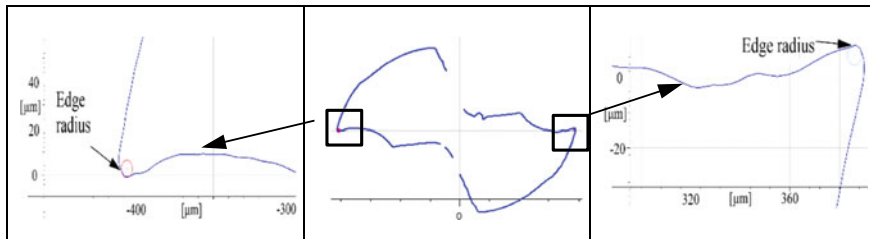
Measurement of cutting edge radius of 0.8 mm diameter end mill cutter
